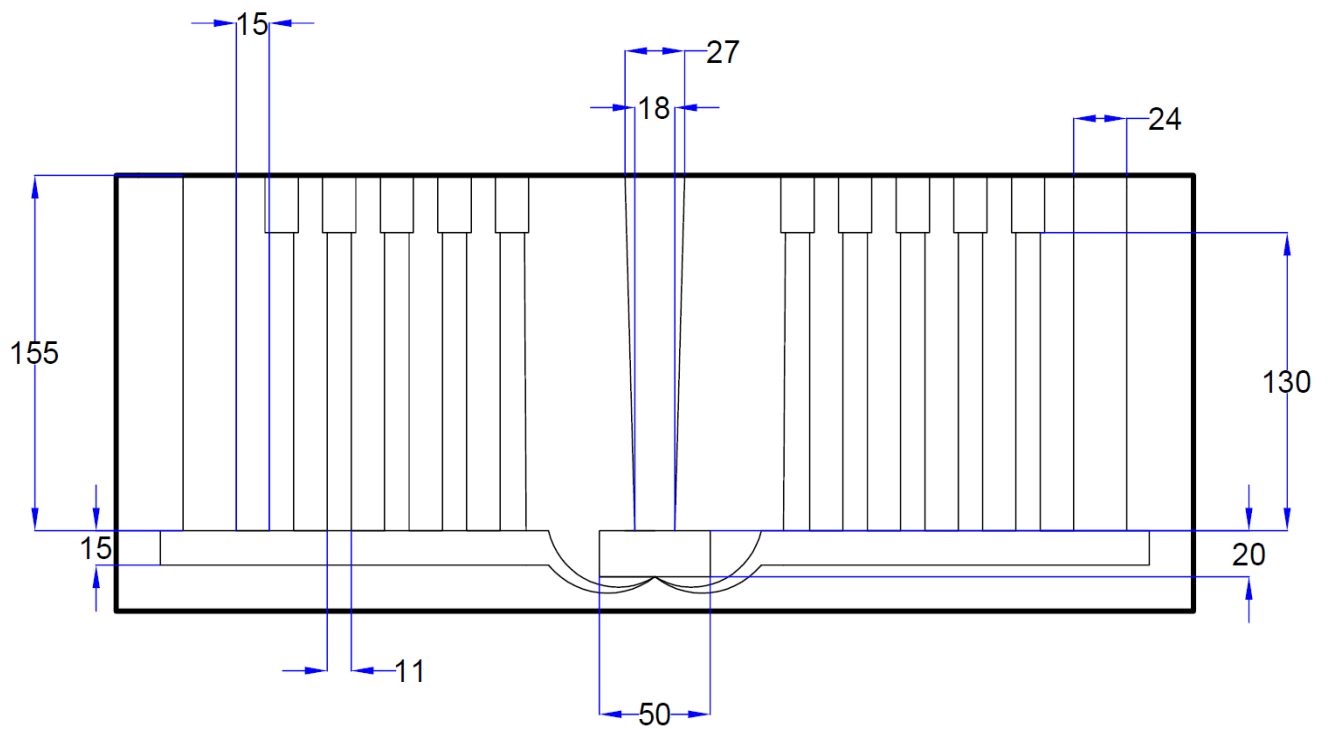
The sketch of the mould with reduced bi-film defect content.
